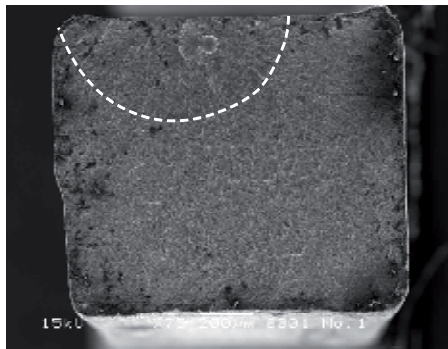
SEM photograph of fracture surface for cast SMA in alternating-plane bending fatigue
